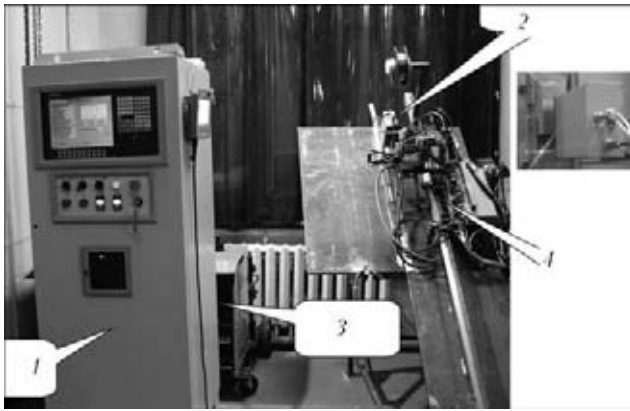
Adaptive automatic welding machine «Junior»: 1 – control system; 2 – sensor block; 3 – power source; 4 – welding tractor
